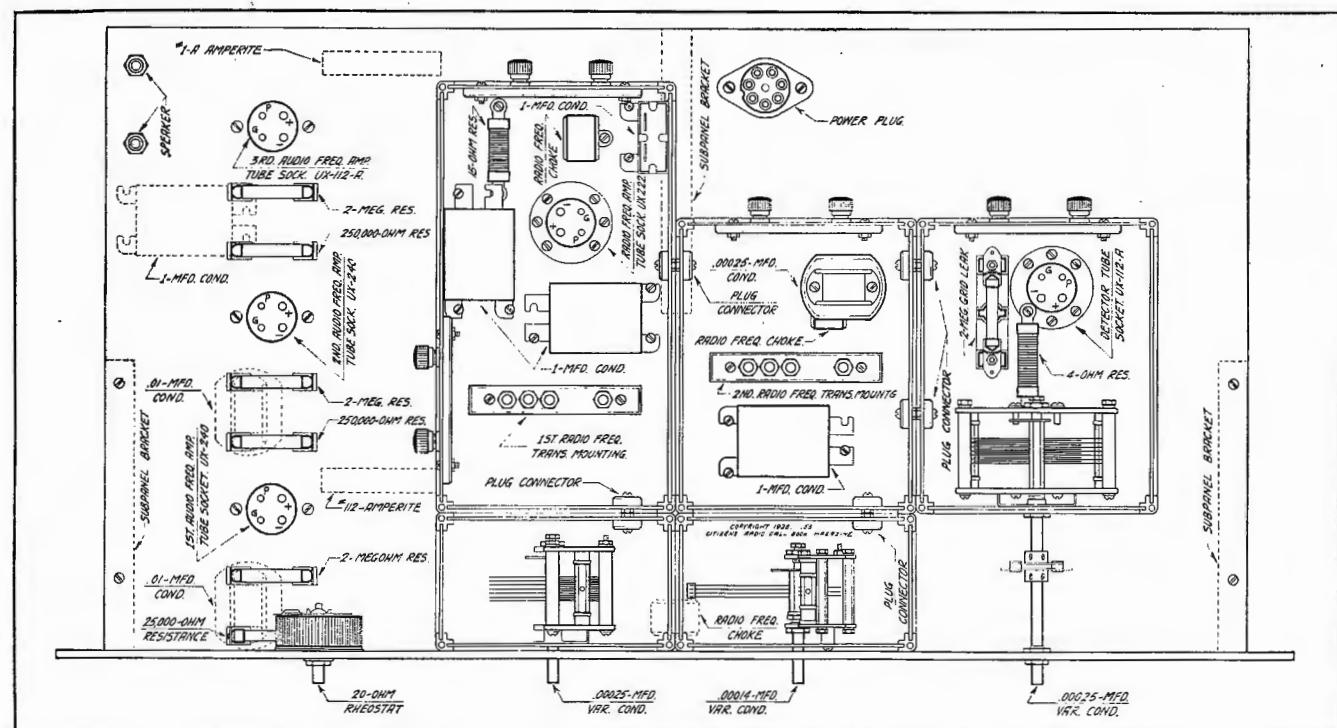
The drawing above gives the builder a clearer conception of how all parts should be mounted on the sub-panel
